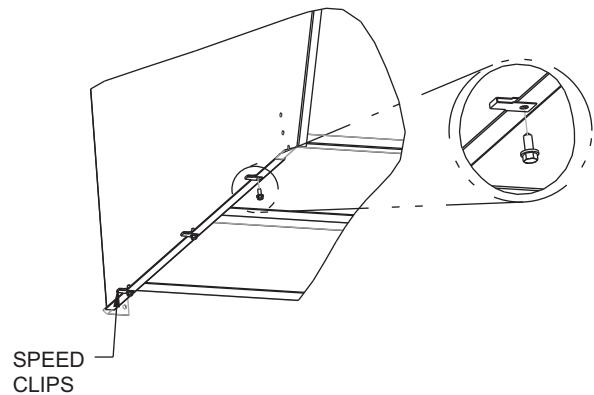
Bottom Filters Installed with Flange Pointing Down
